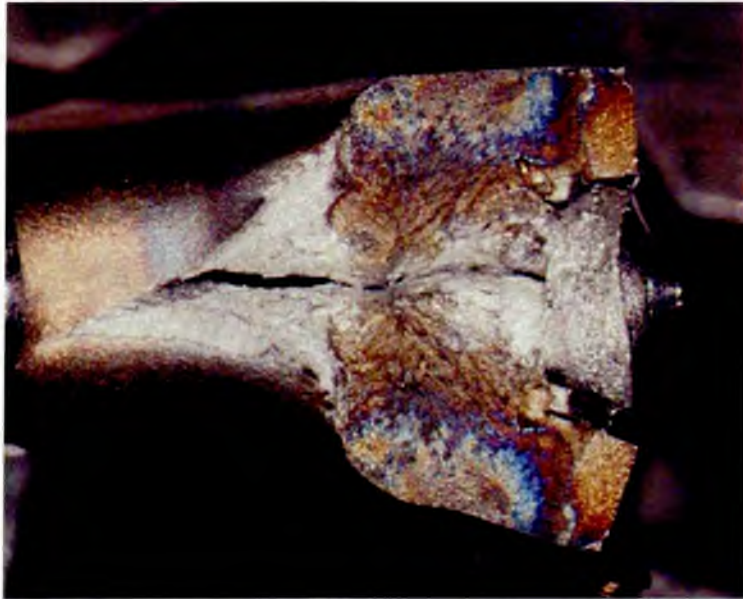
Macro Image of Underside Cracking Observed in Lap Joints using the HyTens 1000 Stainless (the crack has been opened top reveal the fracture surface).
